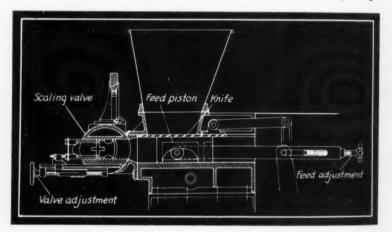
Drive mechanism is mounted on heavy base casting, simplifying maintenance, lubrication, alignment
